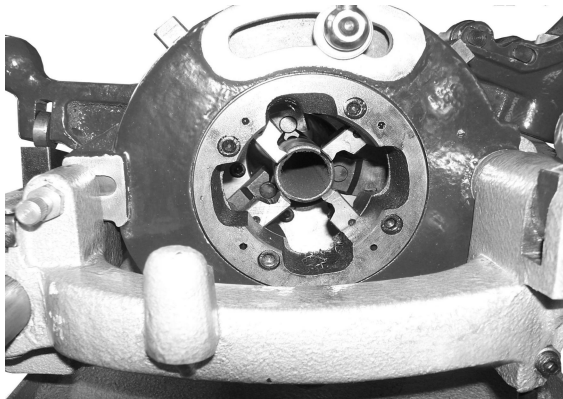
(Threading the end of the pipe with Threading Dies Head)
